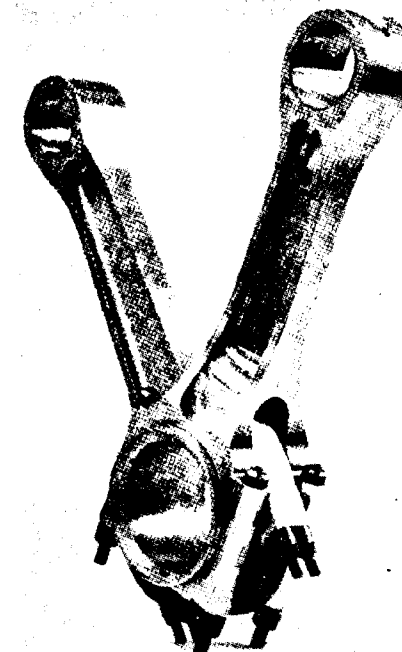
Forked and blade connecting rods with bearings, for the MD Vee-form engine.
